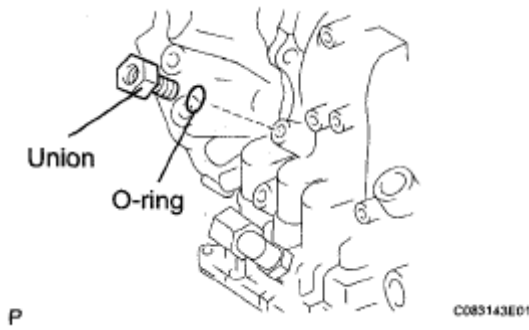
Removing Oil Cooler Tube Union (Inlet Oil Cooler Union)
